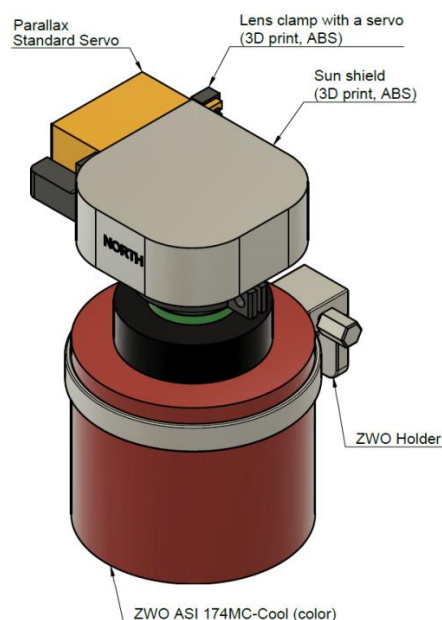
Drawing of the ZWO ASI174MC Cooled camera head with Sun protection.
